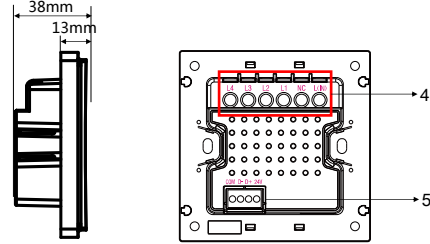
Dimension - Side View 图10. 尺寸图 - 侧面
